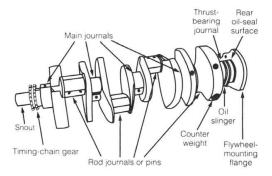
Typical crankshaft with main journals that support the crankshaft in the engine block. Rod journals are offset from the crankshaft centerline
